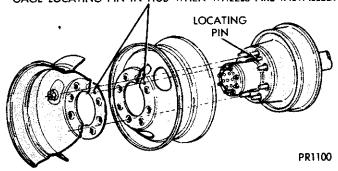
Eight-Stud Hole Dual Rear Wheels
